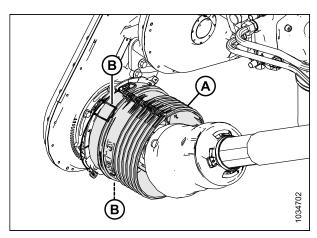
Driveline with Shield Installed on Float Module Gearbox Shaft
